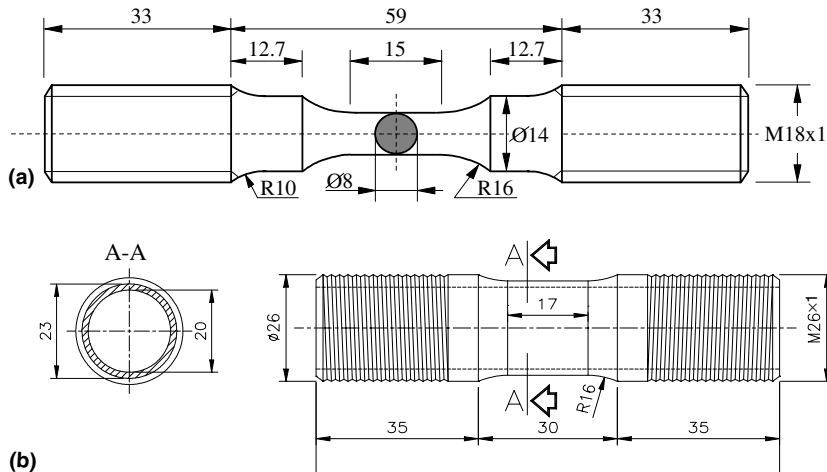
Geometry of the specimens used in the low-cycle fatigue tests (dimensions in mm): (a) alloy 6082-T6 standard round specimens, (b) alloy 6060-T6 tube specimens.
